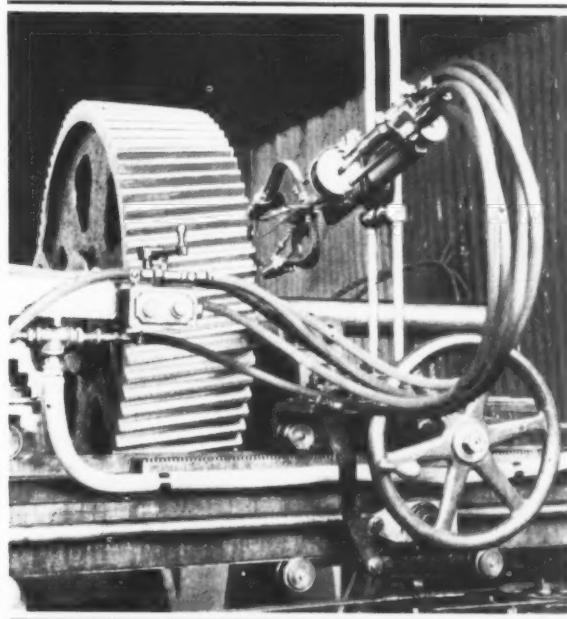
Hardening Opposite Sides of a Gear Tooth by Applying Two Torches Mounted on the Same Head
